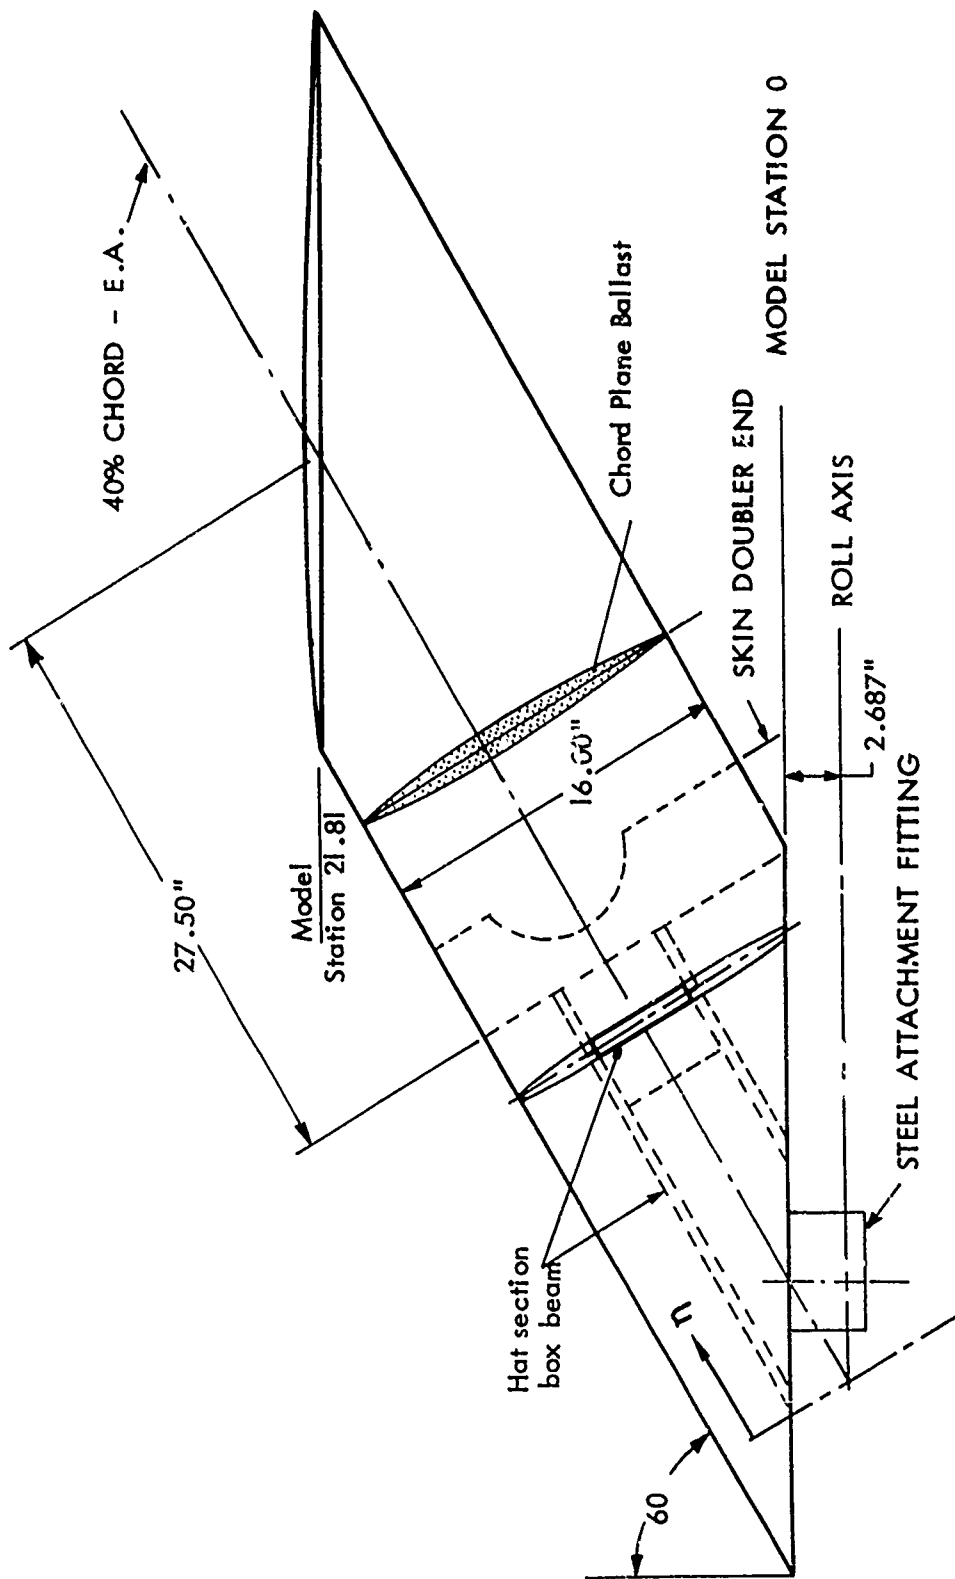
65° SWEEP MODEL ASSEMBLY. (Reproduced from reference 2)
